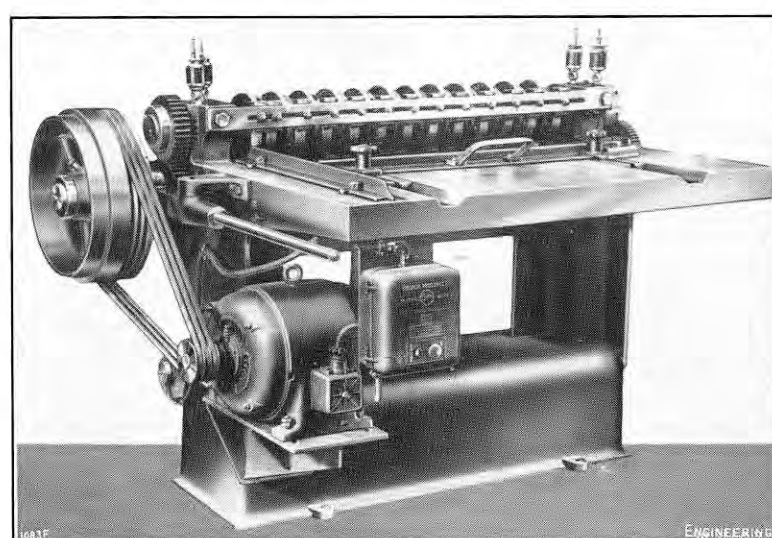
GANG-SLITTING MACHINE; E. W. BLISS (ENGLAND), LTD.
